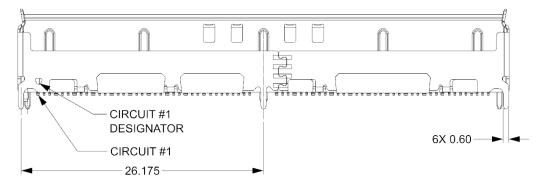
Dual-Bay Front View of Fixed-Side Connector Cage
